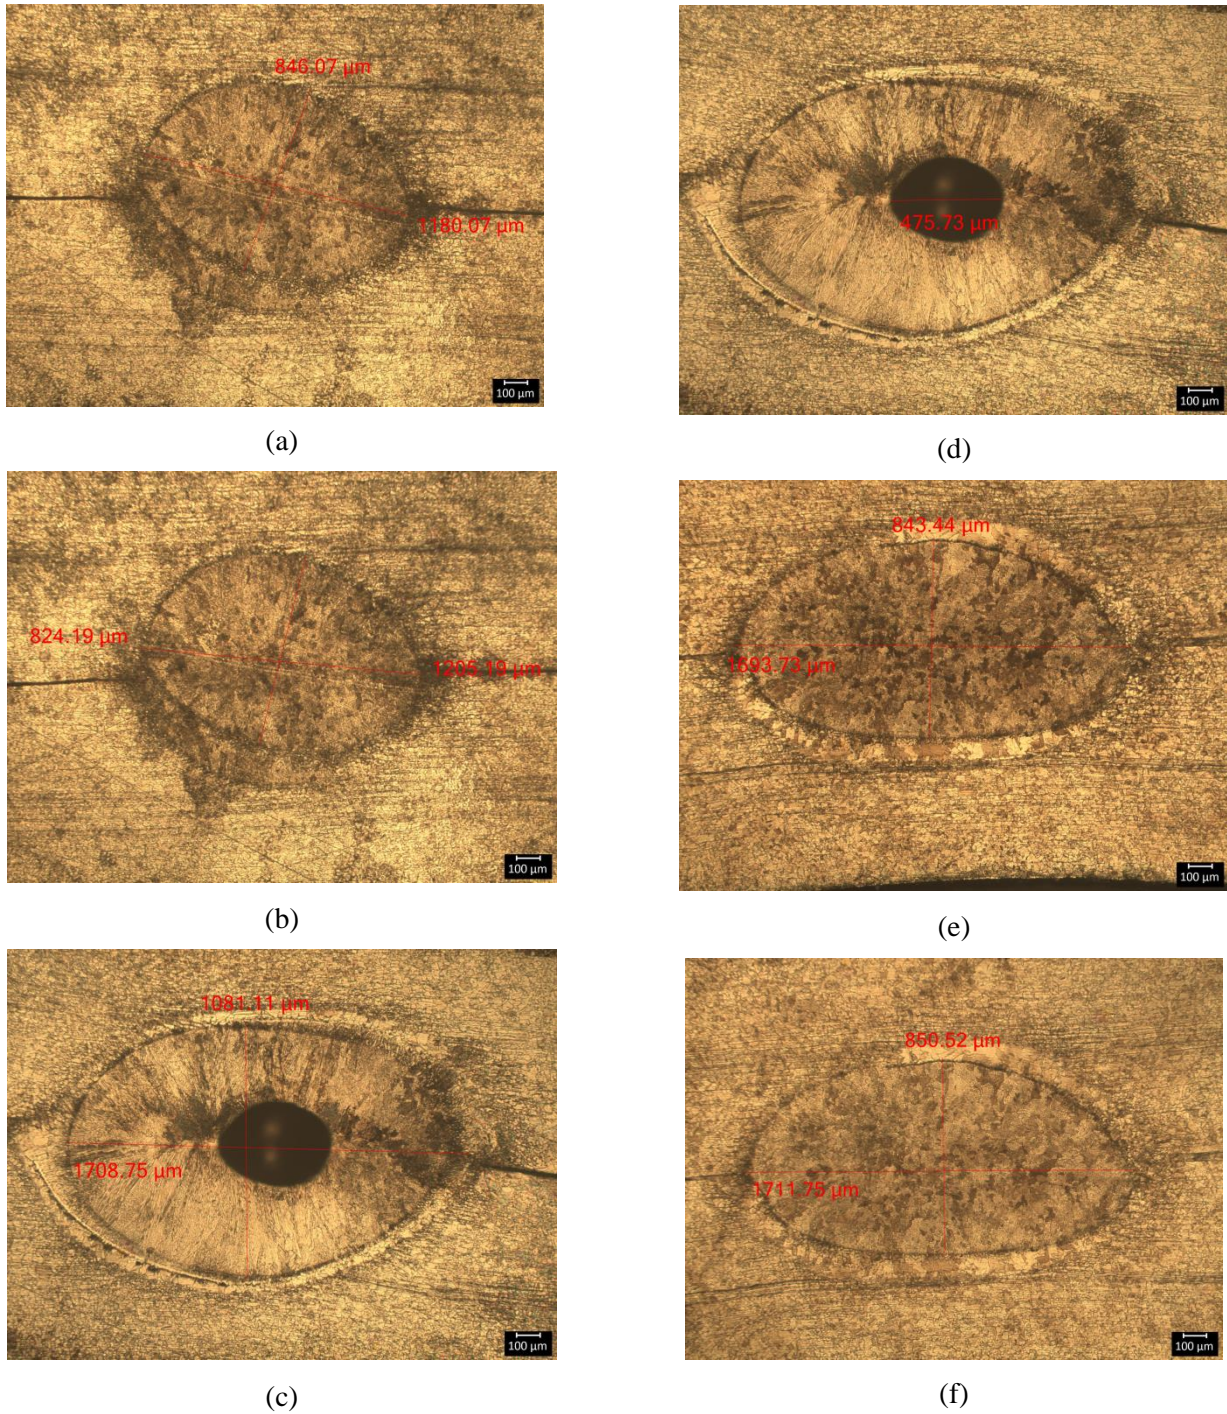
Macro images of the structure of 316L steel welding nugget with different currents. a) Welding nugget of the 15 kA sample, b) Welding nugget of the 20 kA sample, c) Welding nugget of the 25 kA sample, d) Cavity created in the 25 kA sample, e) Welding nugget of the 30 kA sample, f) Welding nugget of the 35 kA sample.
